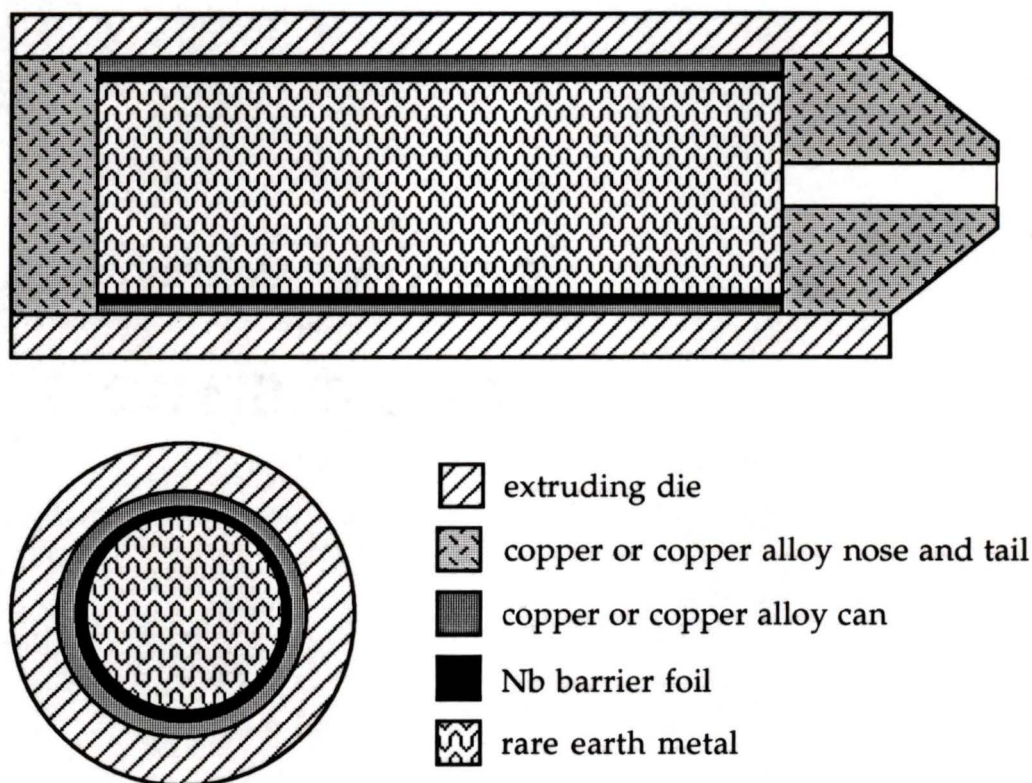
Schematic of billet used to hot extrude dysprosium.
